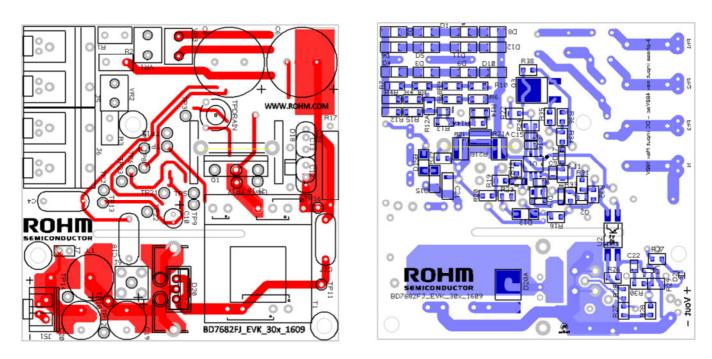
Layout of top side (left) and bottom side (right) of the AUX board.
